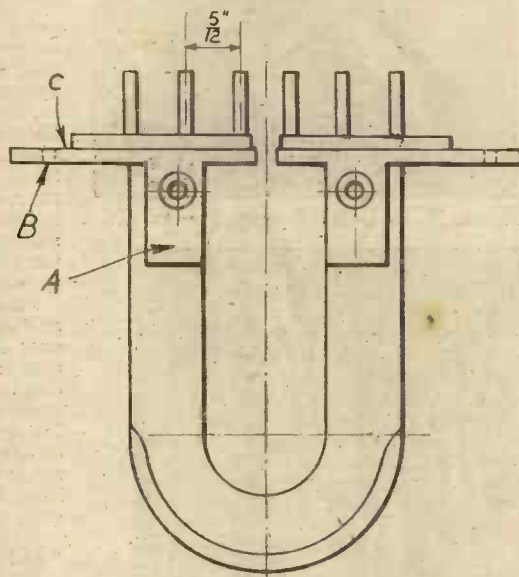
The magnetic unit for the six-string guitar. The additional pole-pieces are assembled and then bolted to magnet.
